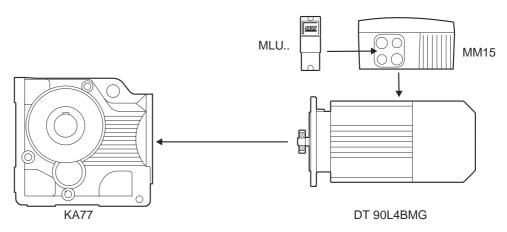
Example for the unit designation of a MOVIMOT[®] gearmotor
